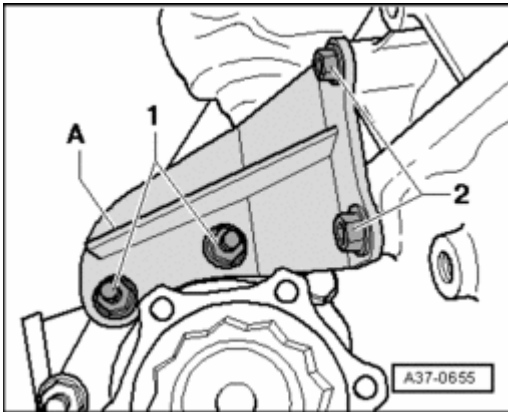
Identifying Bracket For Bevel Box & Bolts
